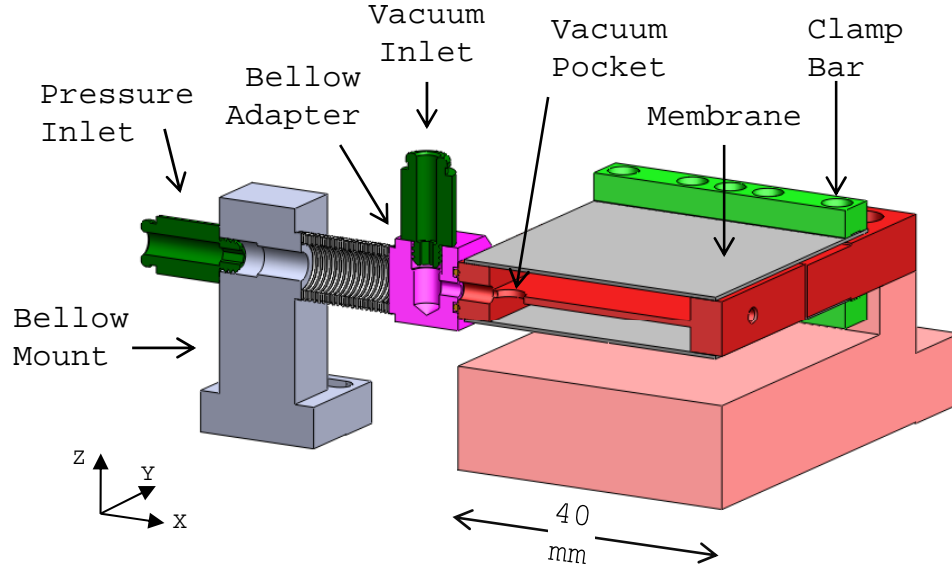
CAD cross-sectional view of the coarse approach mechanism showing the bellow and the vacuum clamp design.
